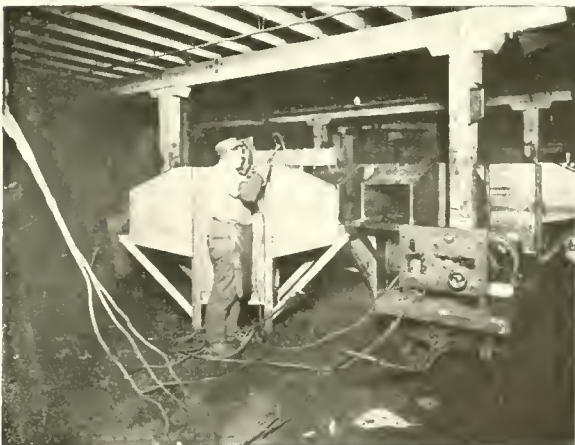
Tanks for dish-washing machines welded with a portable Lincoln Arc Welder, shown in illustration.
